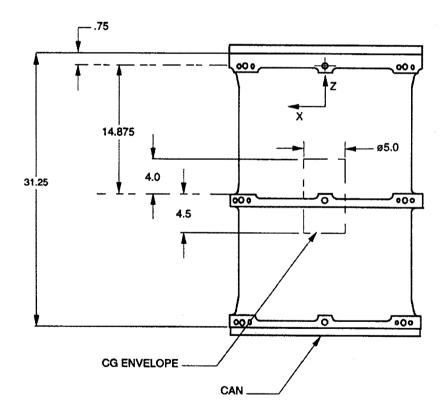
CANISTER CG ENVELOPE-ADAPTER BEAM OR BRIDGE MOUNTING
